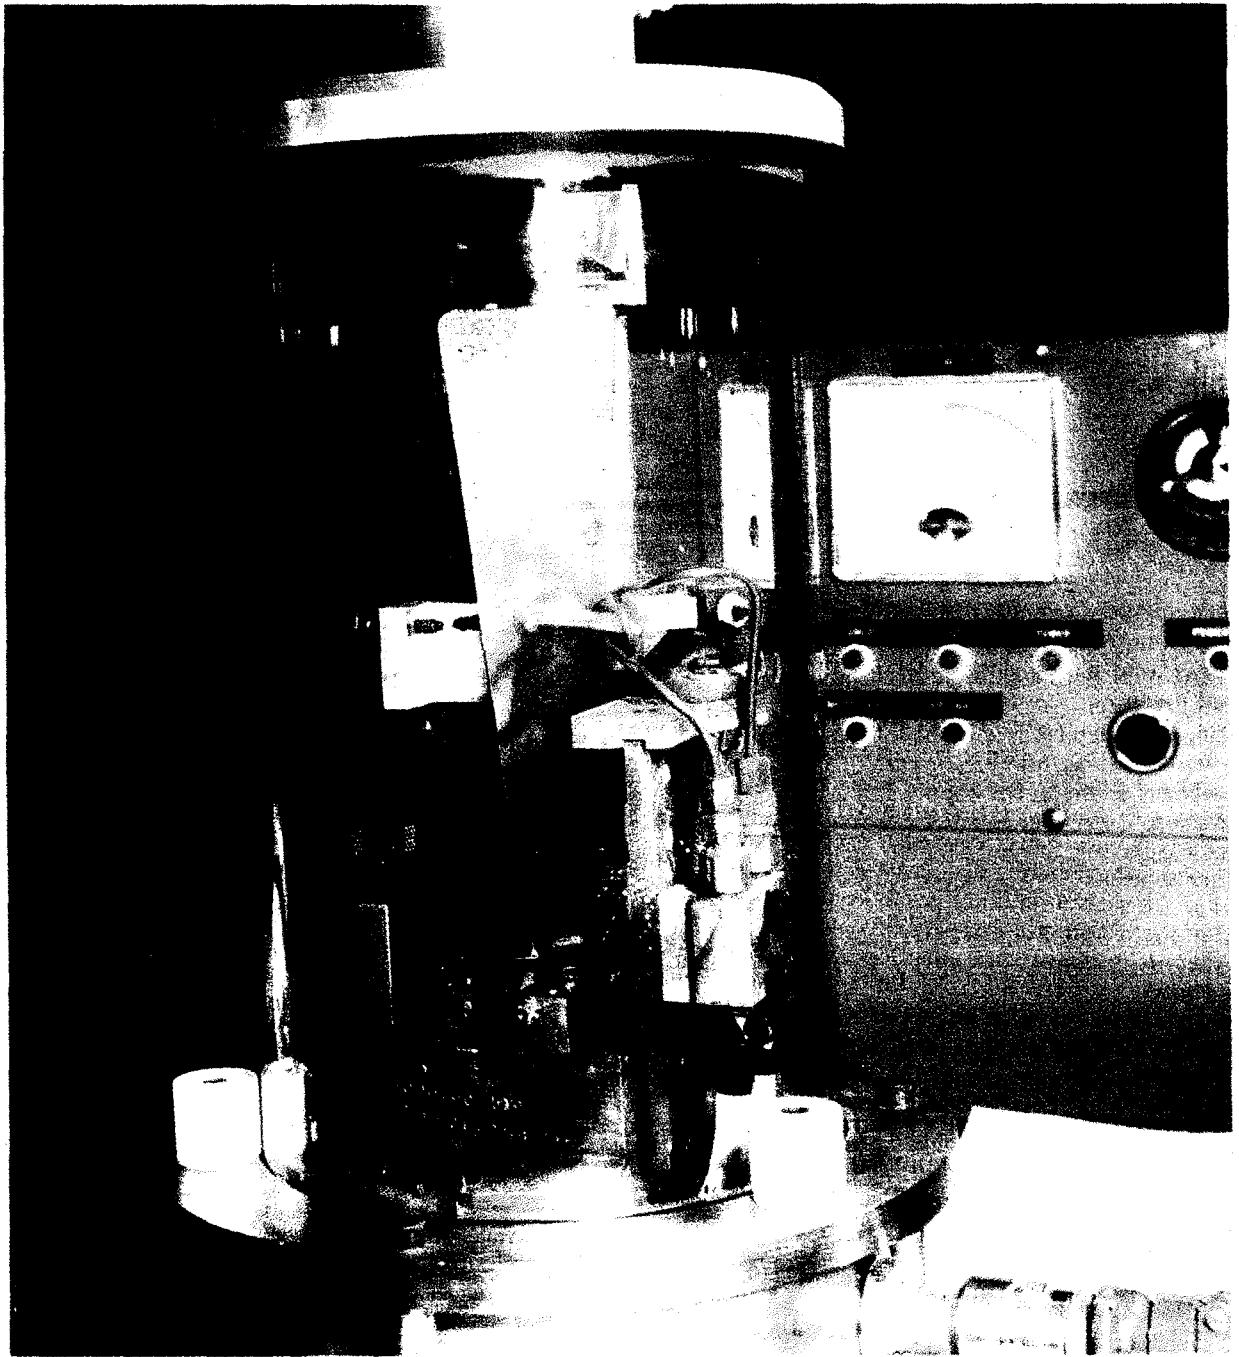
Example of Vacuum Induction Brazing. A Tungsten Carbide Wear Pad is Being Brazing to A Titanium Compressor Blade
